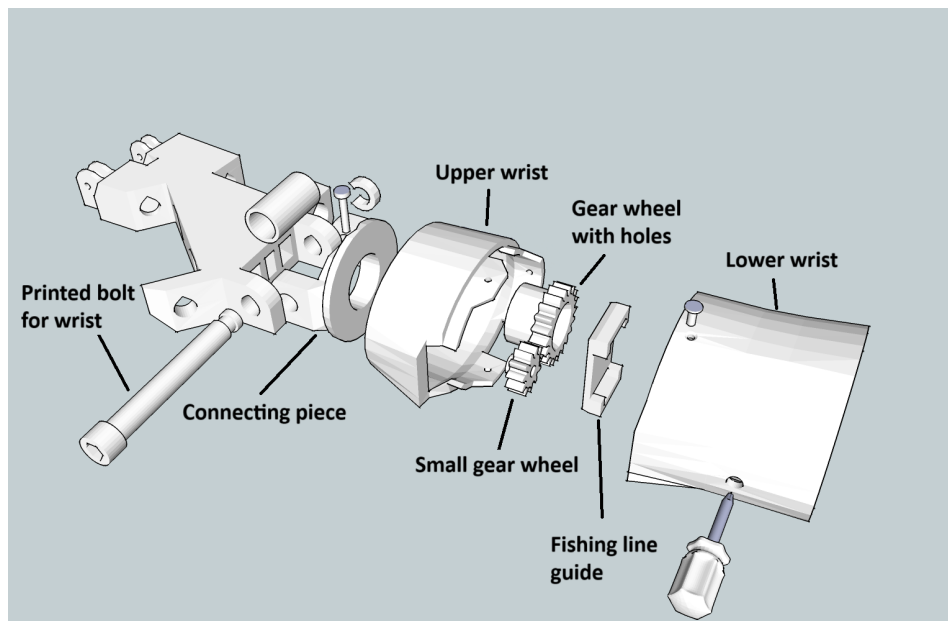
Exploded view of the wrist (adapted from [13]).
